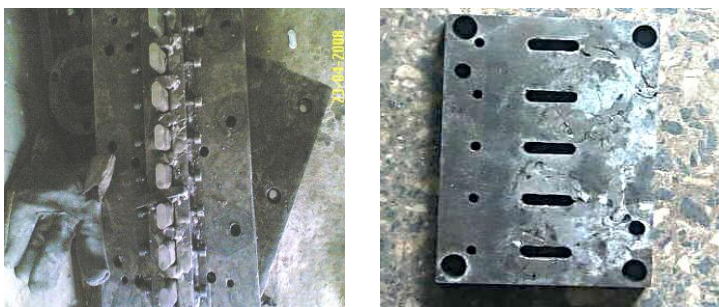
The key component parts of the mould housing (a) upper plate of the punching machine (b) lower plate of the punching machine
